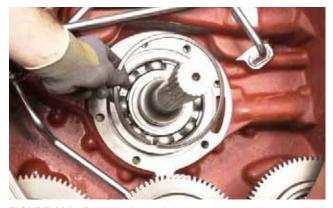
From the front of the housing, install turbine shaft bearing snap ring. Tap shaft until snap ring is in full position in groove.
